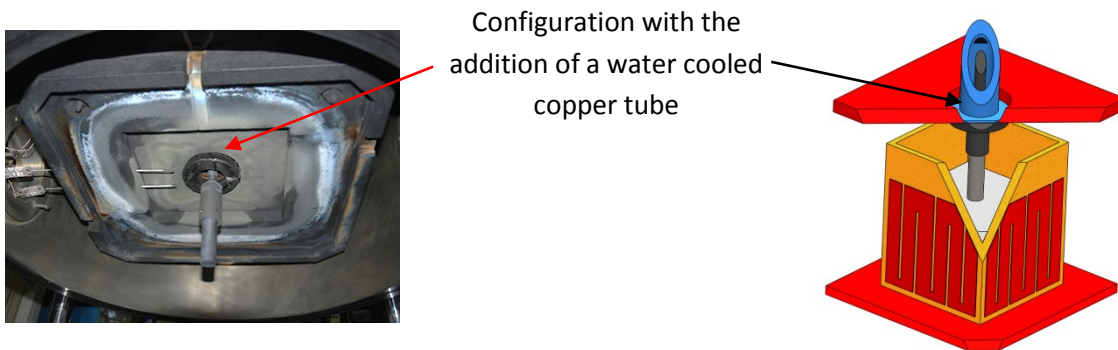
Addition of a cooled copper tube around the seeding parts as a heat sink
